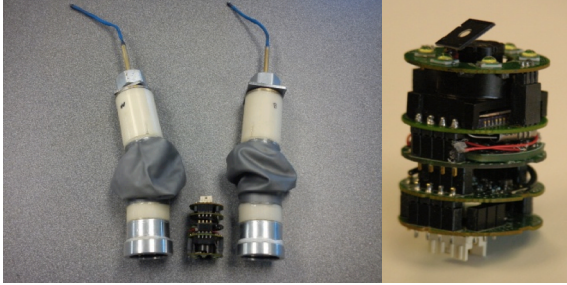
Left: CMs final prototype, Right: PCB stack after assembly.
